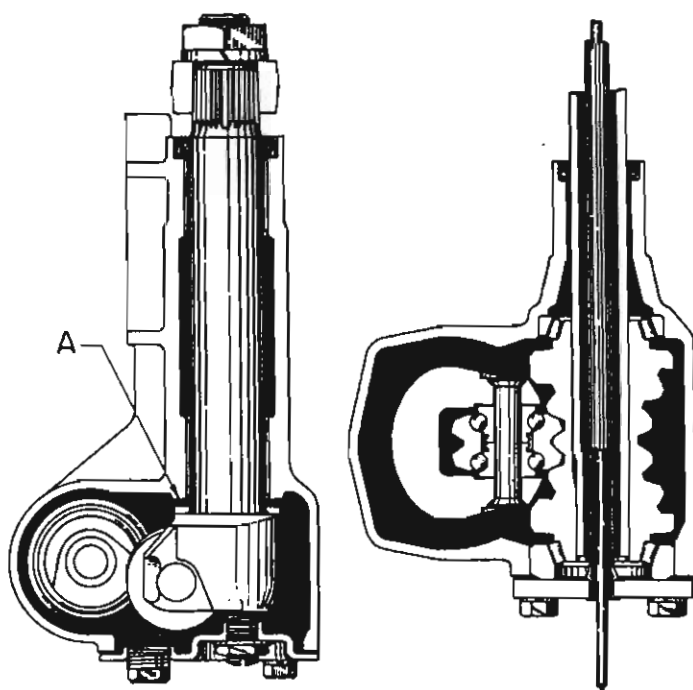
Steering Gear Assembly with Double-Tooth Roller Type Cross Shaft.
